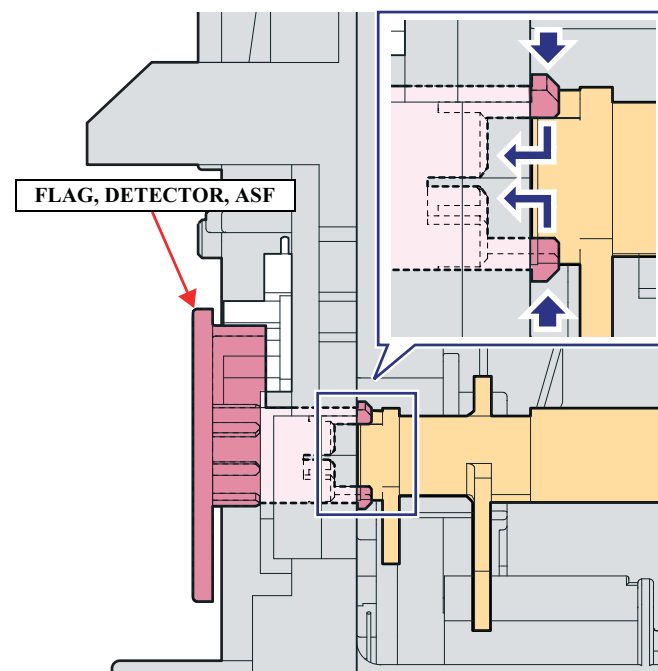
Removing the FLAG, DETECTOR, ASF
